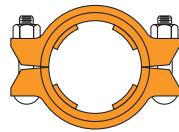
P, Fig. 7051P & Fig. 7060P Page 129
